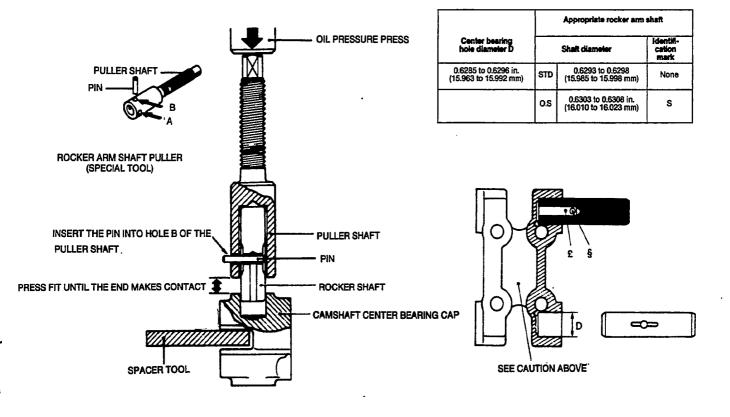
PRESS FITTING OF ROCKER ARM SHAFTS
